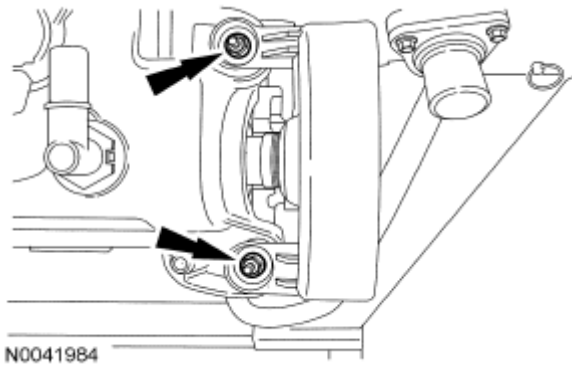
Locating Coolant Pump Drive Pulley Cover Nuts
